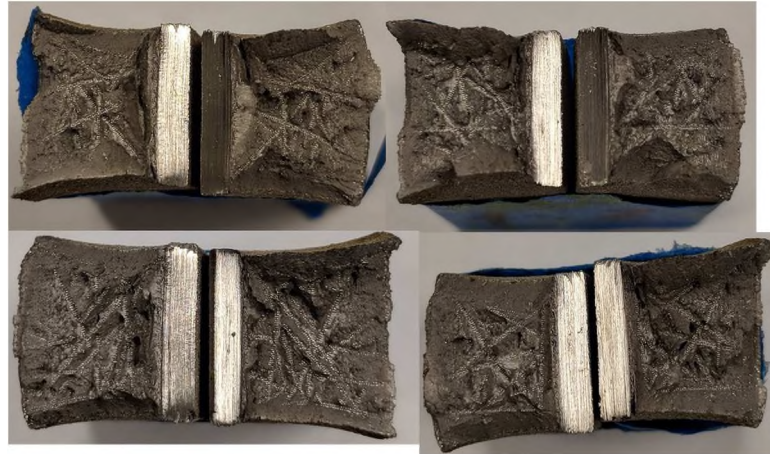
The fracture surface of broken Charpy specimens built with the highest ED #1.
